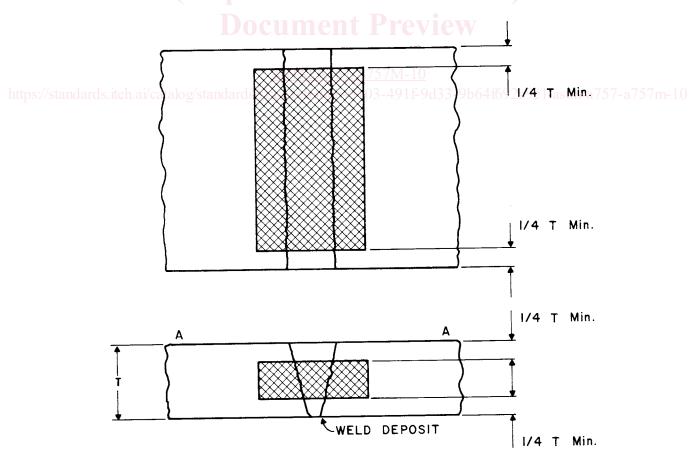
Charpy V-Notch Specimen Must Be Within Cross-Hatched Zone With Notch in the Weld Metal Perpendicular to Surface A-A
